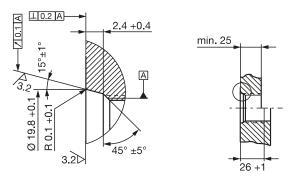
Mounting hole M18x1.5 per ISO 6149 O-ring 15.4x2.1
